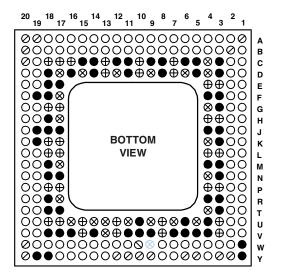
256-Ball SBGA Ball Configuration (Bottom View)
